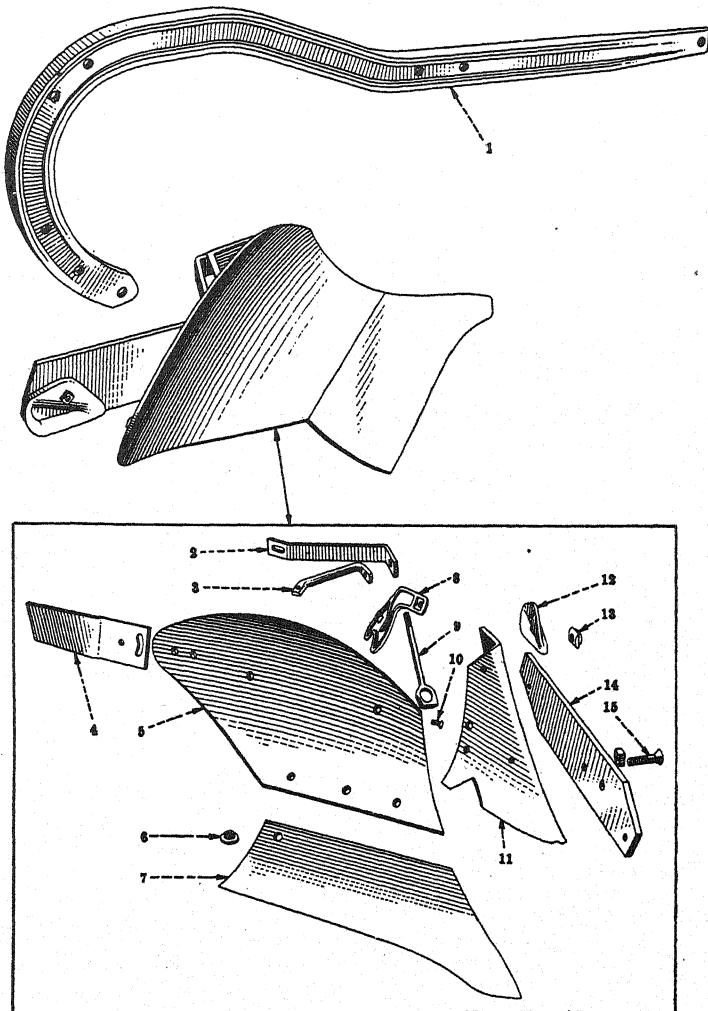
Beam and bottom. 1—Beam. 2—Moldboard brace. 3—Bottom brace. 4—Mold extension. 5—Mold. 6—Flange washer. 7—Share. 8—Lock bolt bracket. 9—Lock bolt. 10—Lock-bolt stud. 11—Frog. 12—Heel casting. 13—Beam washer. 14—Landside. 15—Special heat-treated plow bolt.
